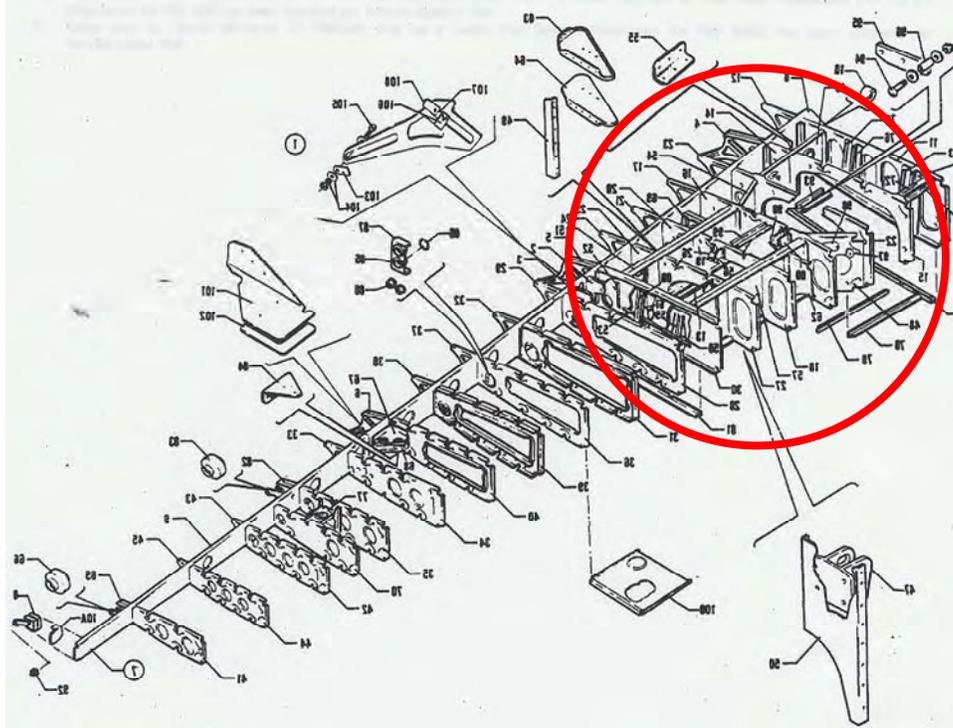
Location of Damage Observed on the Right Main Landing Gear Wheel Well Structure
